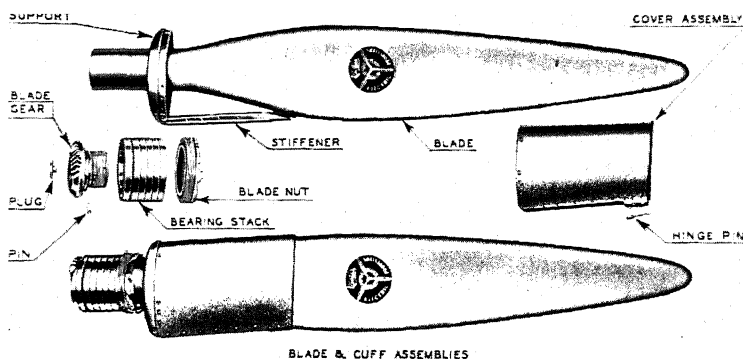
Blade cuff assembly. (Courtesy Curtiss Propeller Division, Curtiss-Wright Corp.)
